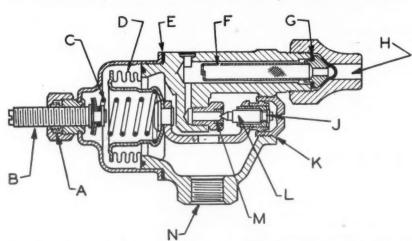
Detroit Lubricator automatic expansion valve employing the flexible metal bellows. (A) moisture-tight packing around adjusting screw; (B) adjusting screw; (C) adjusting spring; (D) bellows; (E) joint; (F) strainer; (G) copper gasket; (H) inlet connection ¼-inch copper tube; (J) needle swivel; (K) plug hermetically sealed with solder; (L) needle; (M) seat; (N) outlet connection.
